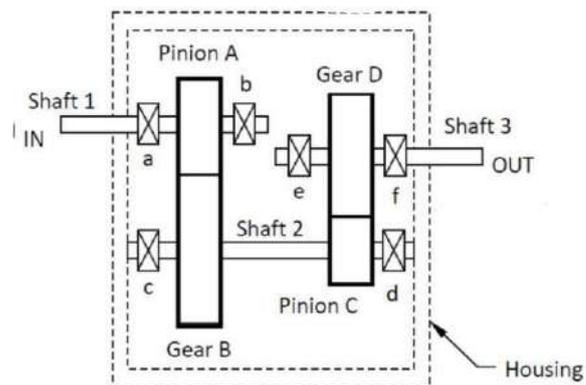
Illustration of the gear disposition inside the experimental gearbox.
